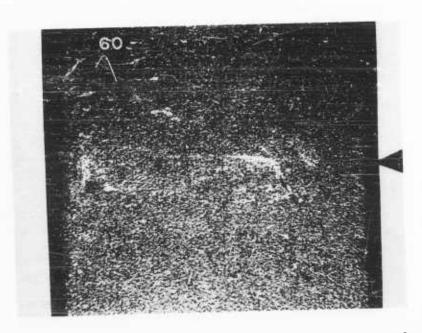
FAILURE IN SPECIMEN NO. 60
